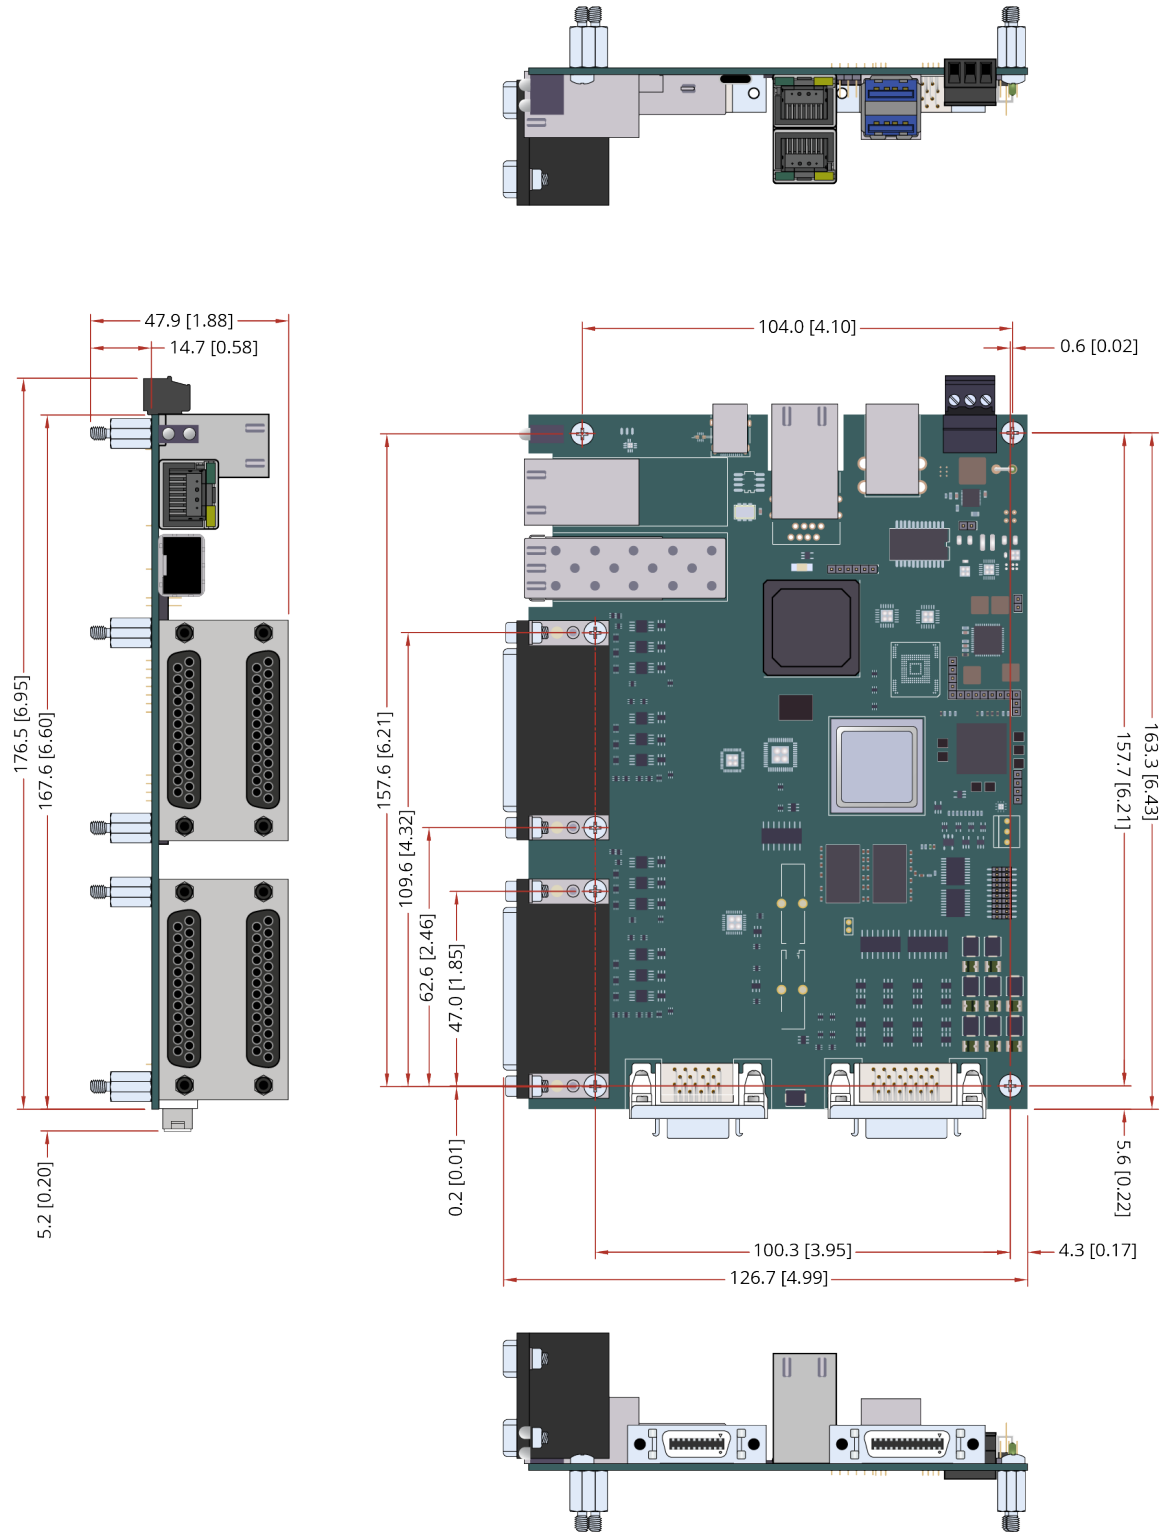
Dimensions [-2P2 (OEM 2-Axis)]
